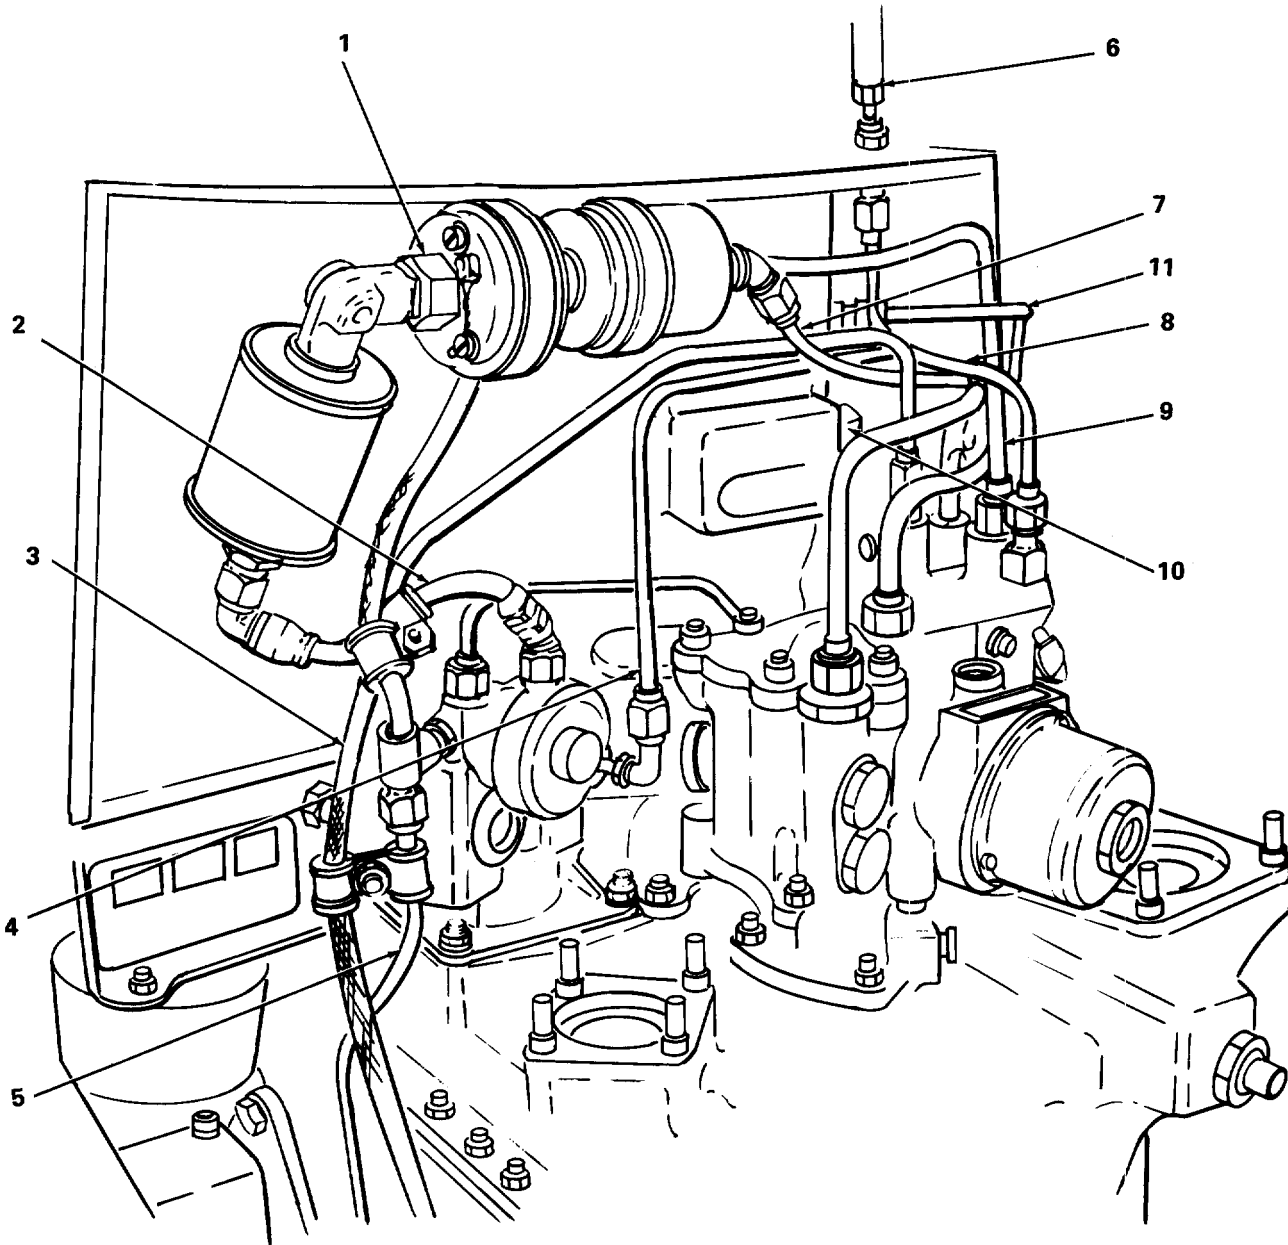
Fuel, Oil, and Air Tubing Parts Requiring Special Torque Values
